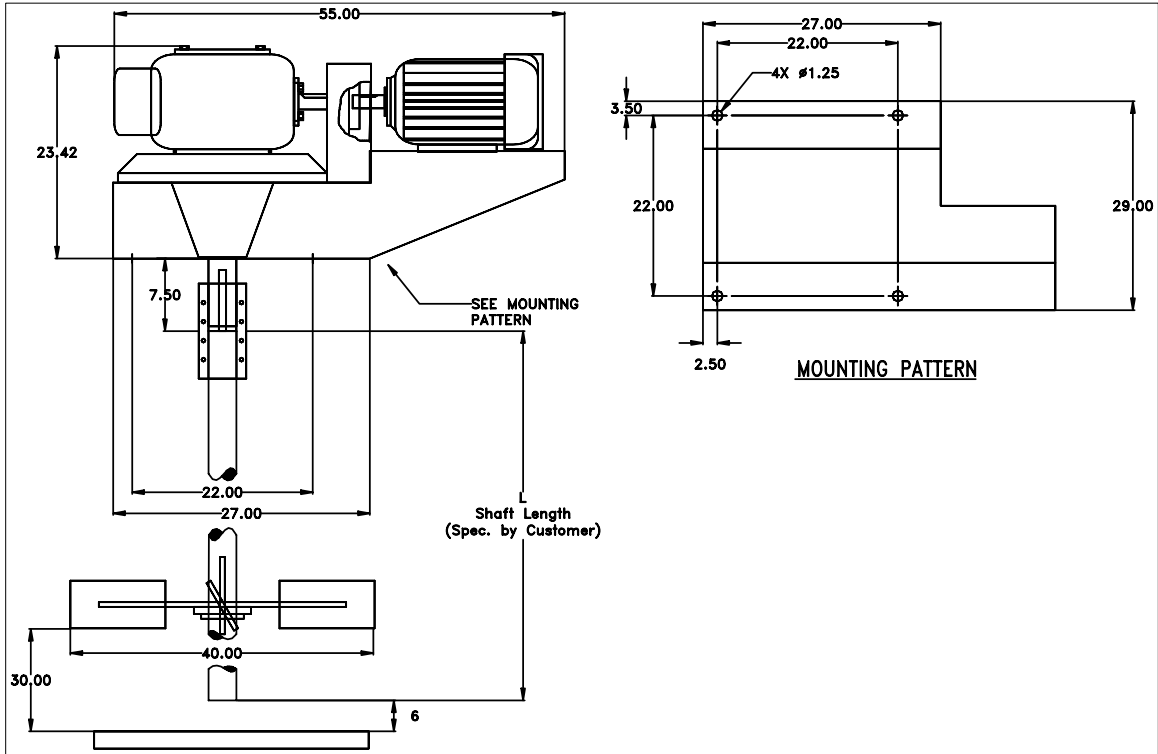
DIMENSIONAL DRAWING MA-15
